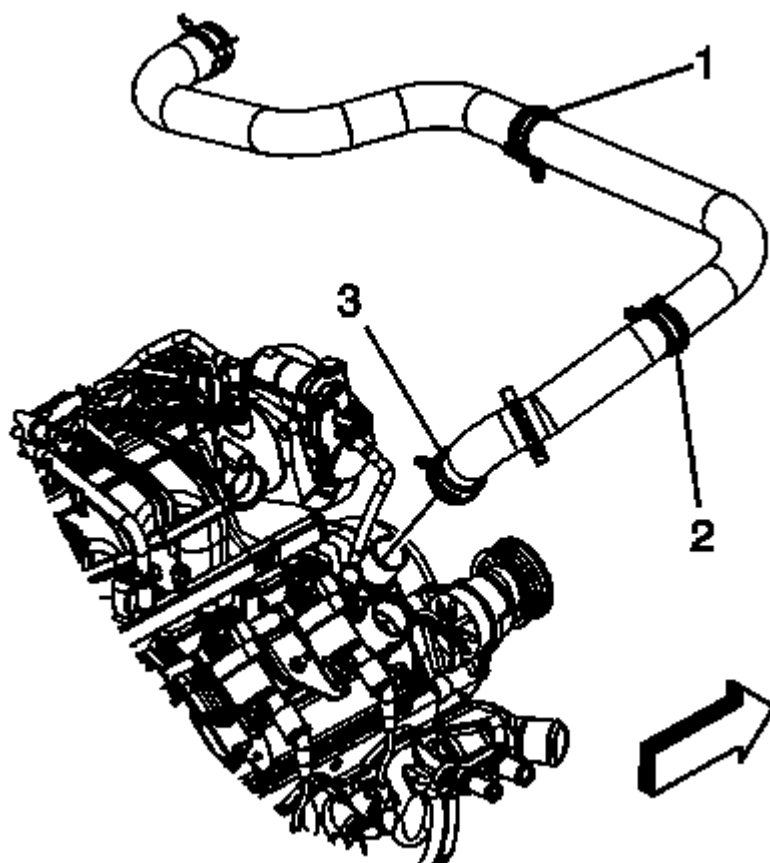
Radiator Vent Inlet Hose Clamp At Water Pump
